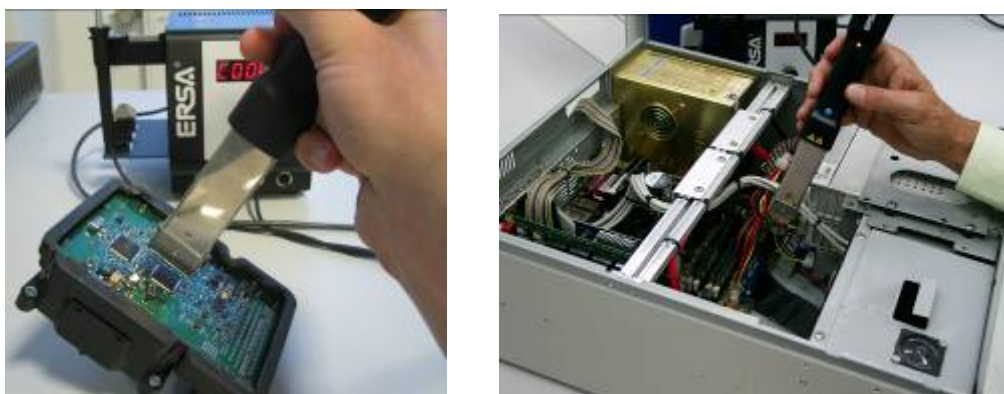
and 6: Problem-free and safe reworking on boards that are still installed in the assembly housings.
